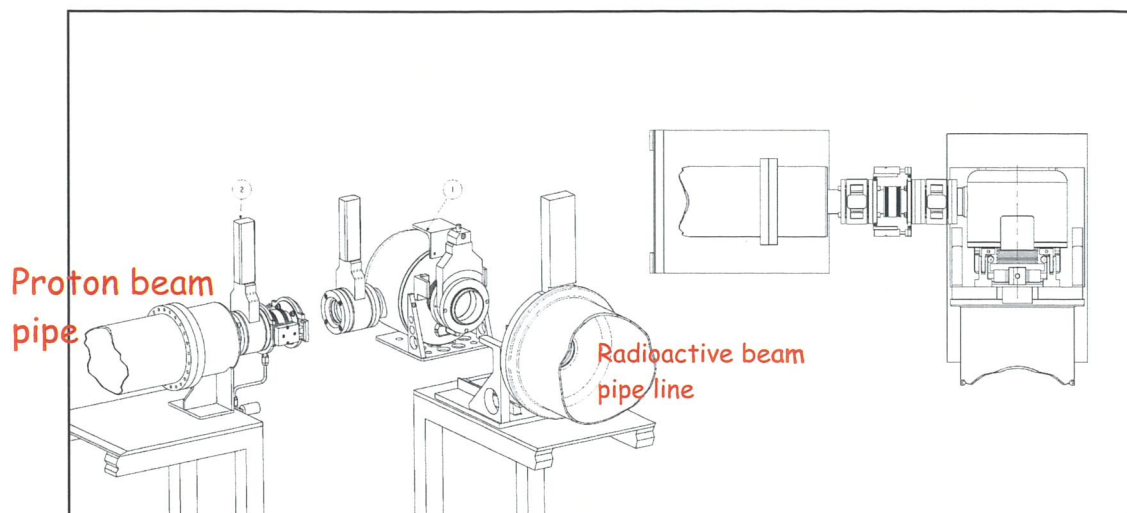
Mechanical drawing of SPES target interconnection to pipes.
